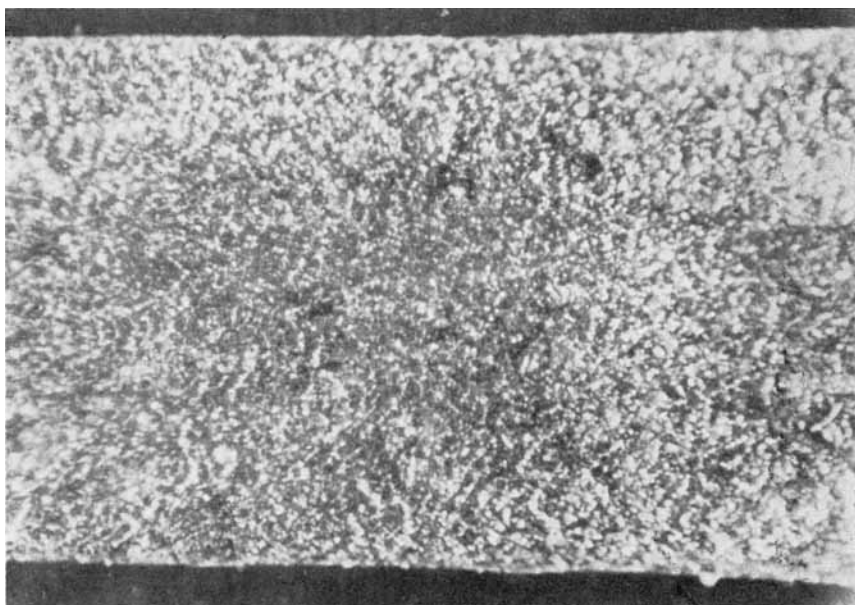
Machine marks in the reduced (center) portion of a typical specimen.
